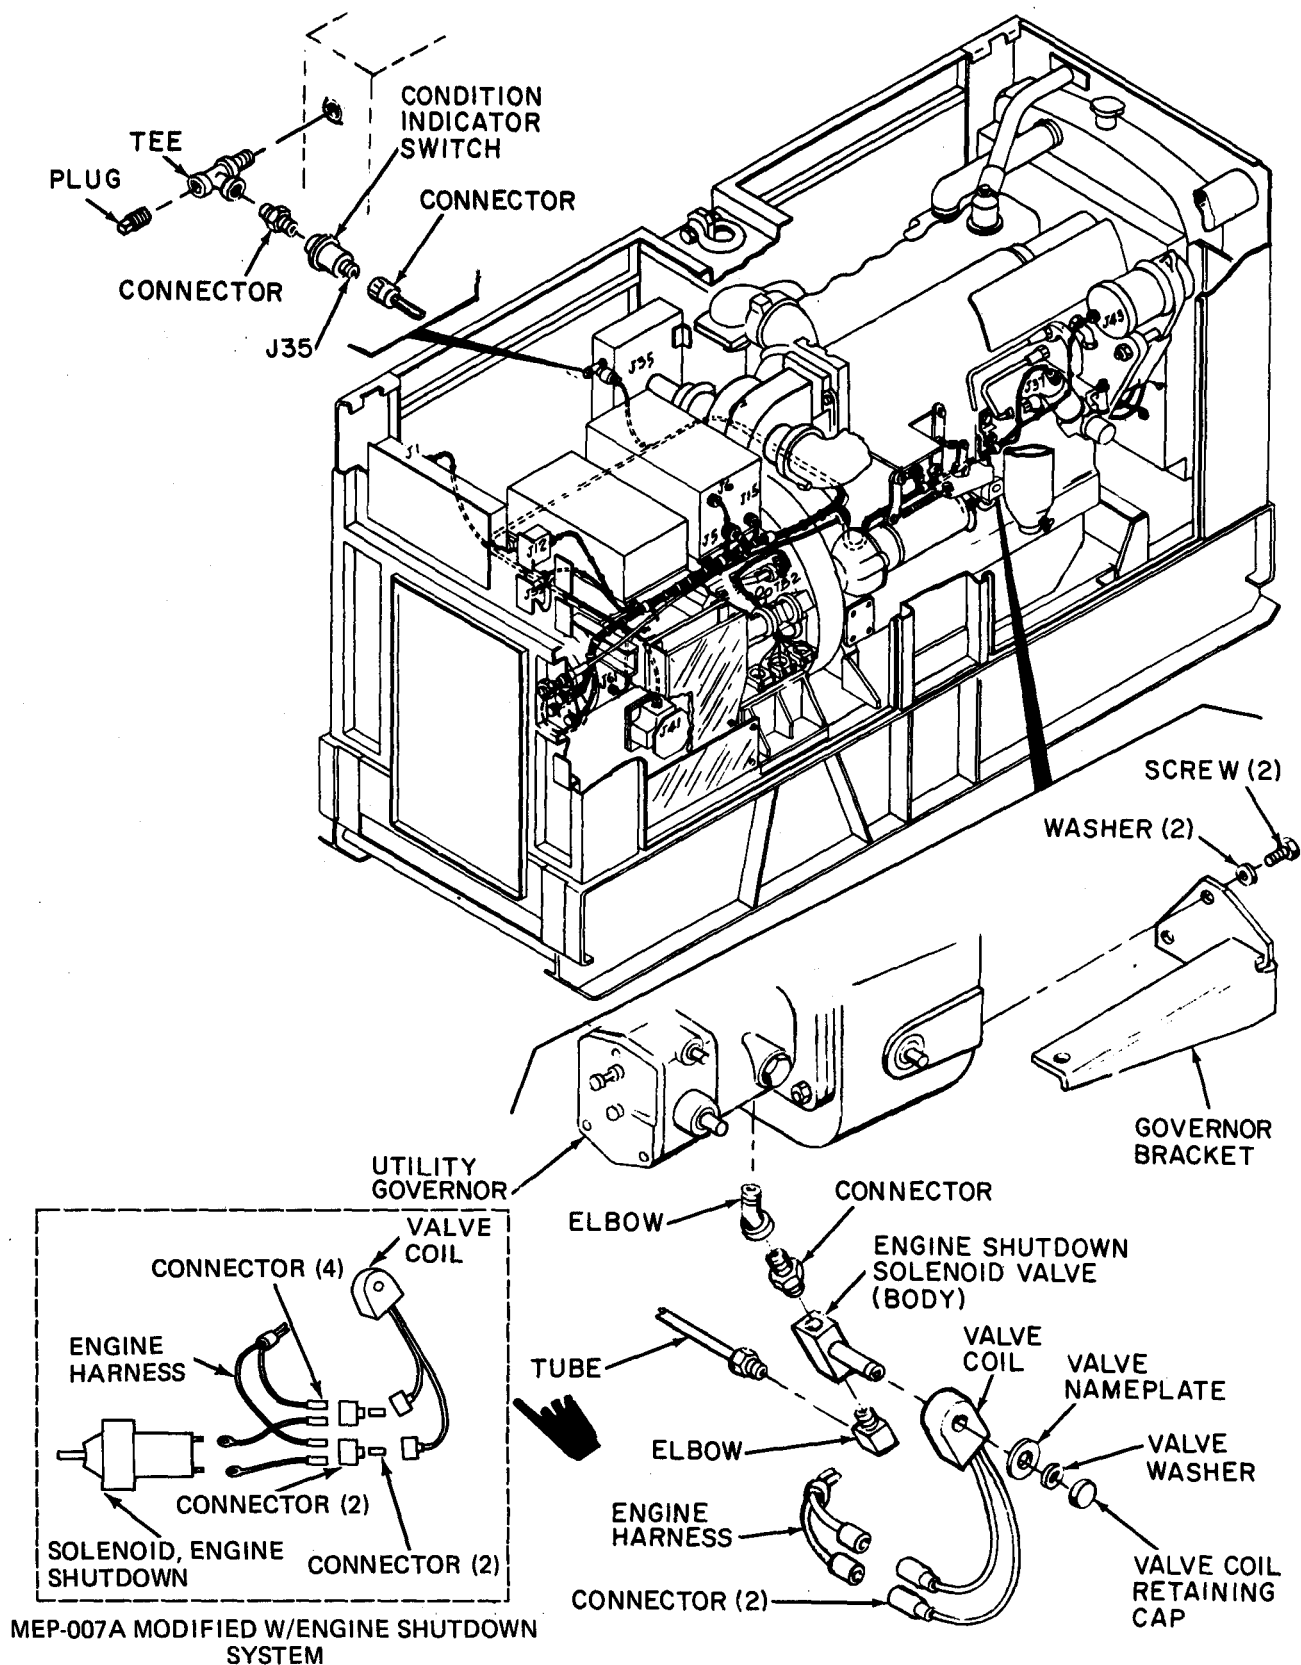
Engine electrical control elements, removal and installation (sheet 2 of 2)
